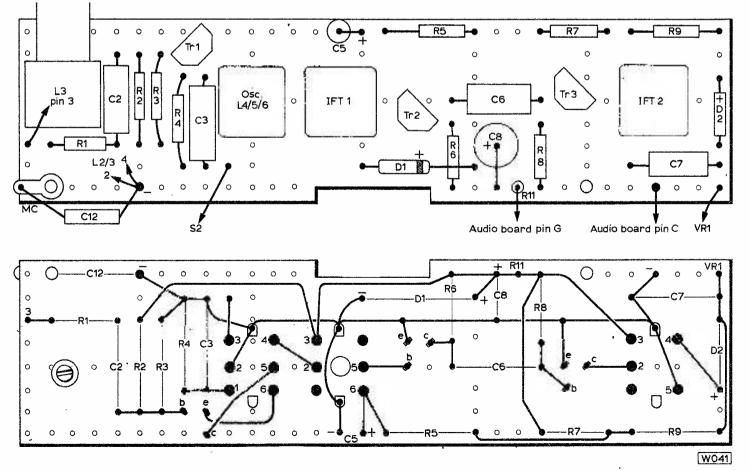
Mixer/IF board, showing both component side and wiring side. The board is cut away in the centre to accommodate the tuning capacitor.
